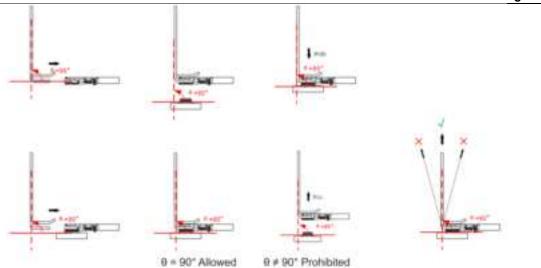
Schematic diagram of fixture plugging and unplugging coaxial cable plug
